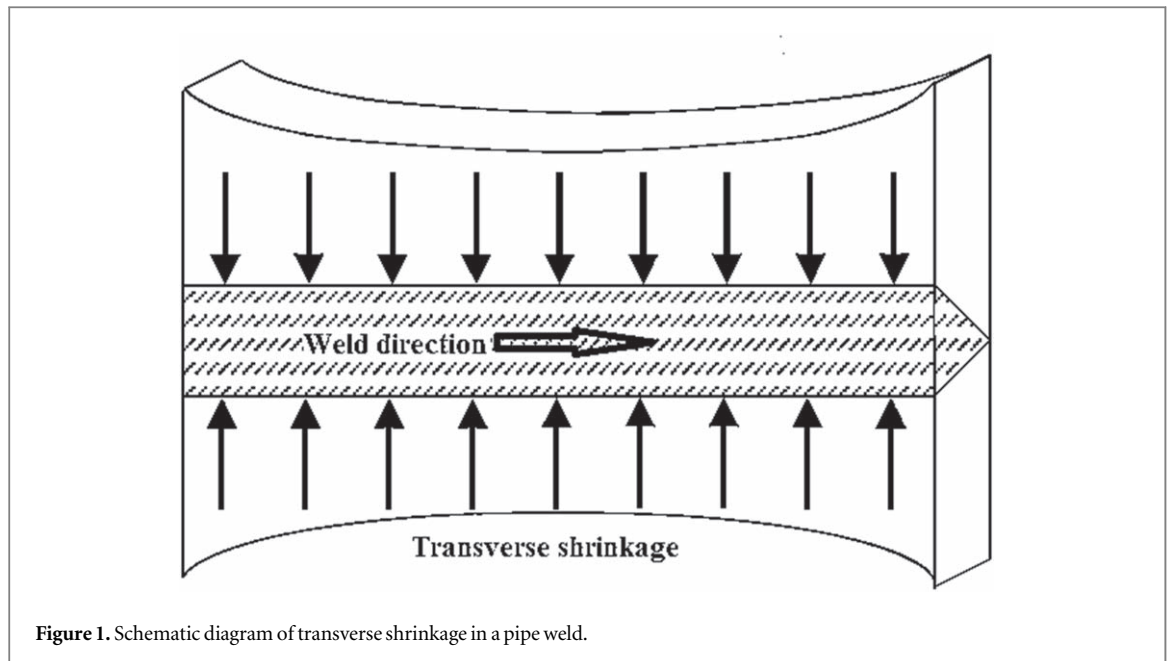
Schematic diagram of transverse shrinkage in a pipe weld.
